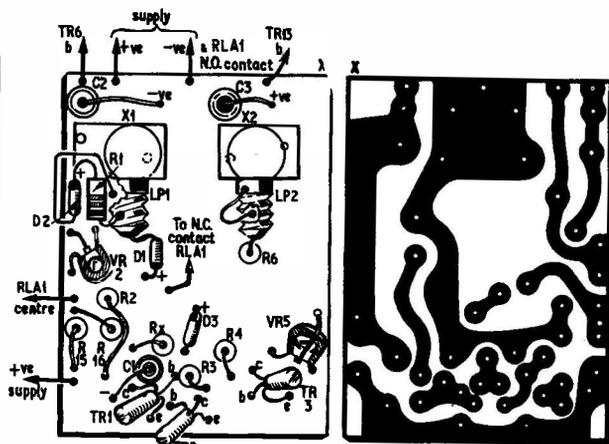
Layout and wiring of the decoder board. The board is shown full size
